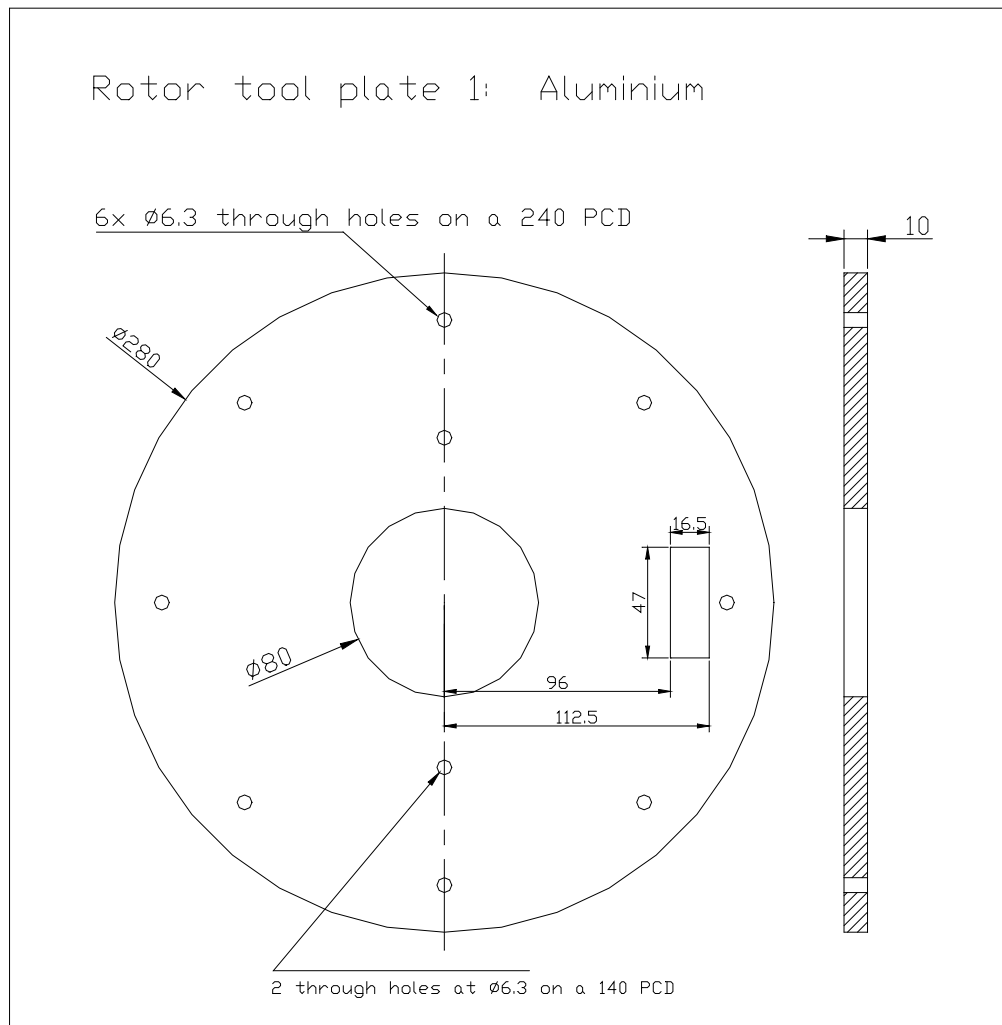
Rotor tool plate 1 for exterior rotor alignment and assembly clamping
